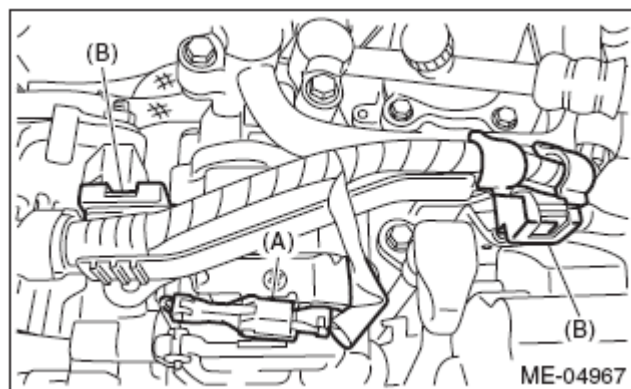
Identifying A/C Compressor Connector And Generator Cord Clip
